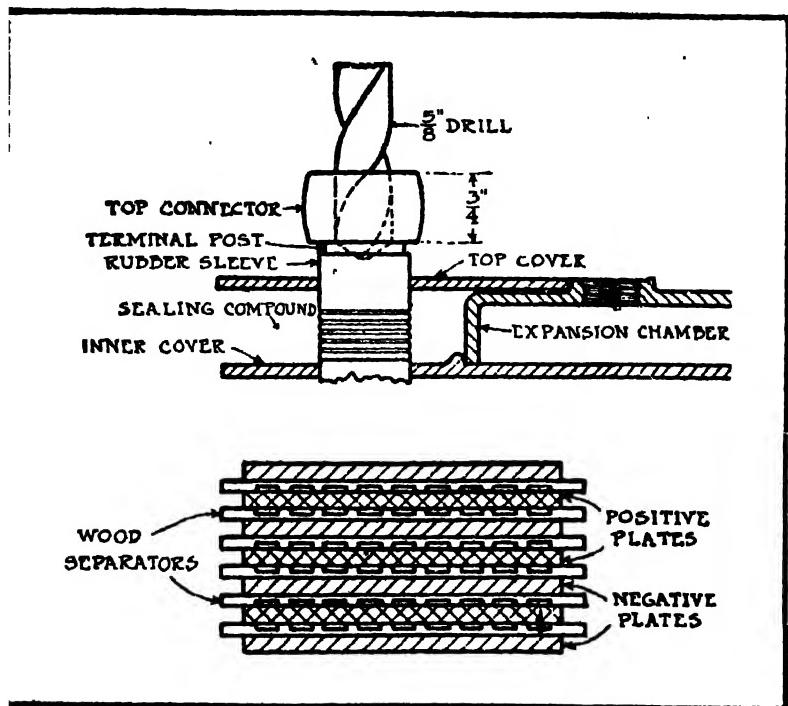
Diagram Showing Construction of Points to be Reached in Rebuilding or Tearing Down Willard Storage Battery.
